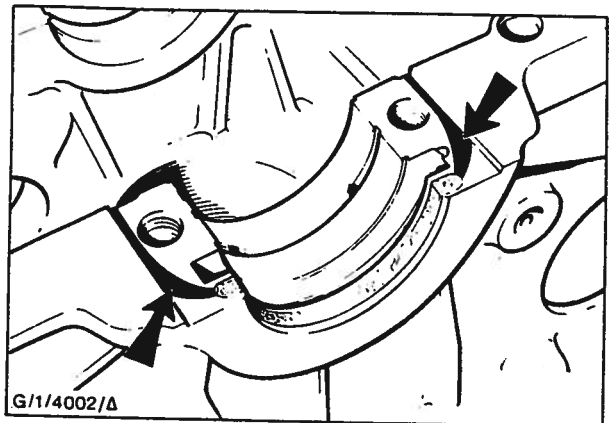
Crankshaft Rear Main Bearing Housing (Apply Sealer in areas shown)
